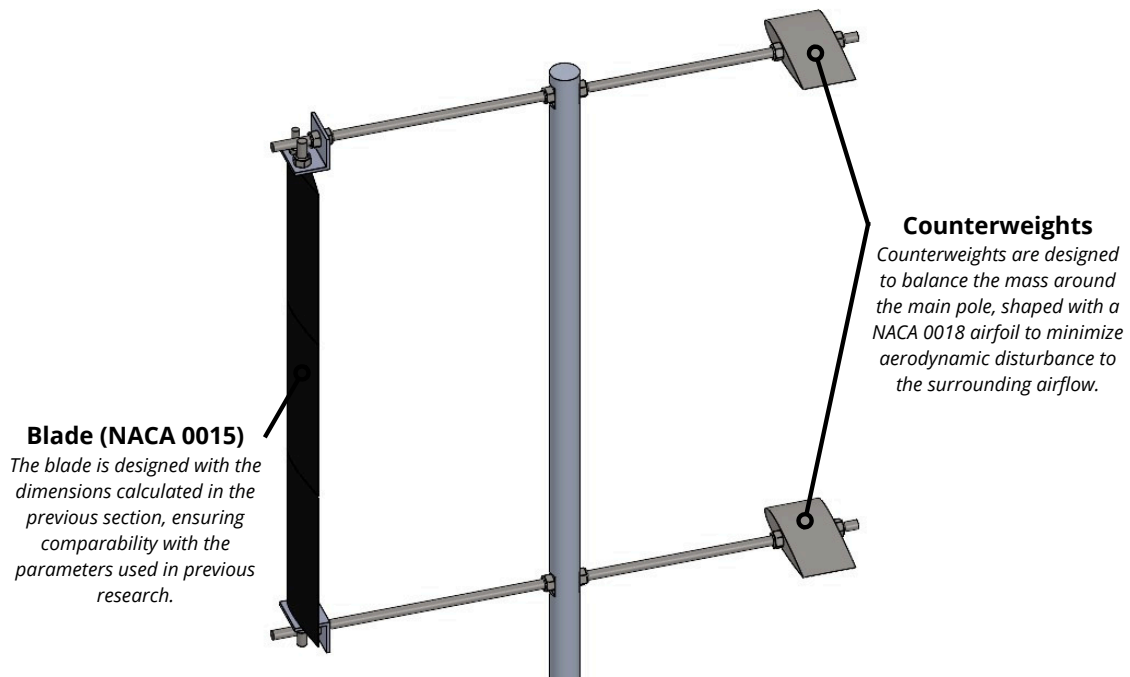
Close-up view of the single-blade rotor, illustrating the NACA 0015 airfoil connected to the central shaft and the counterweights used for balancing. The mounting connection to the shaft is also visible.
